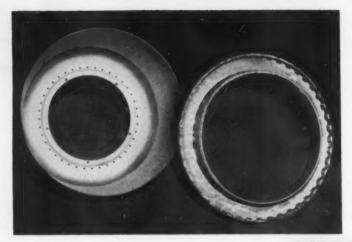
The spinner tub proper (left) and necked ring after all press operations on both have been completed.
